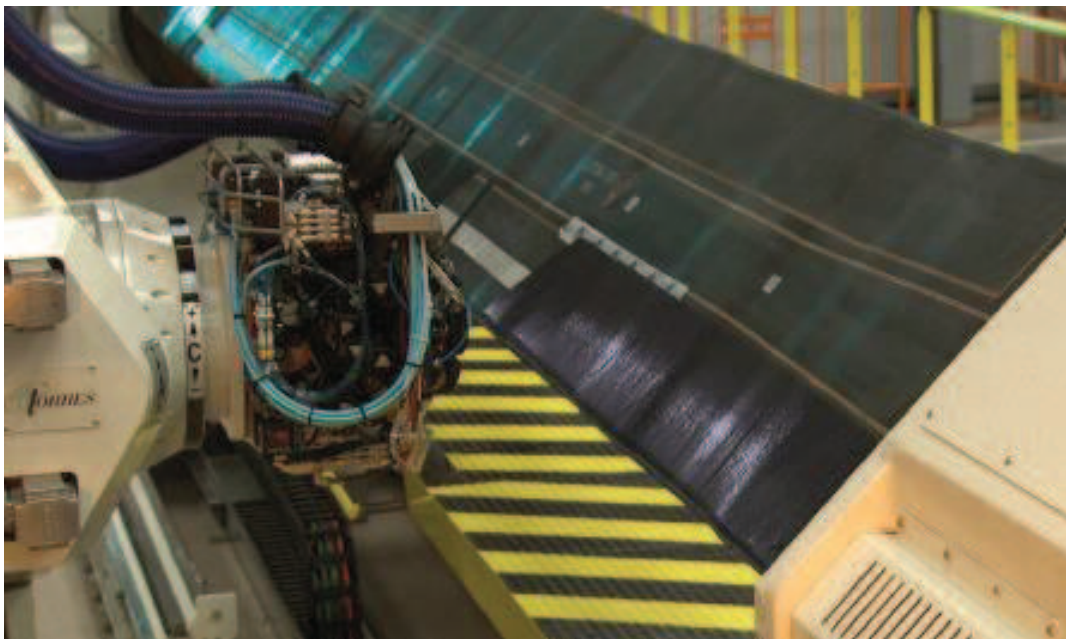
AFP Machine (Photo courtesy of GKN)
